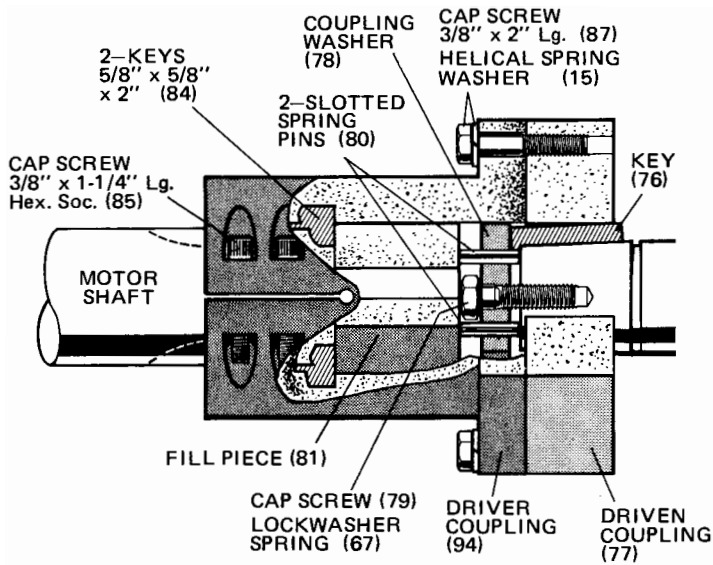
ASSEMBLING MOTOR AND MOTOR SUPPORT TO ROTOR
